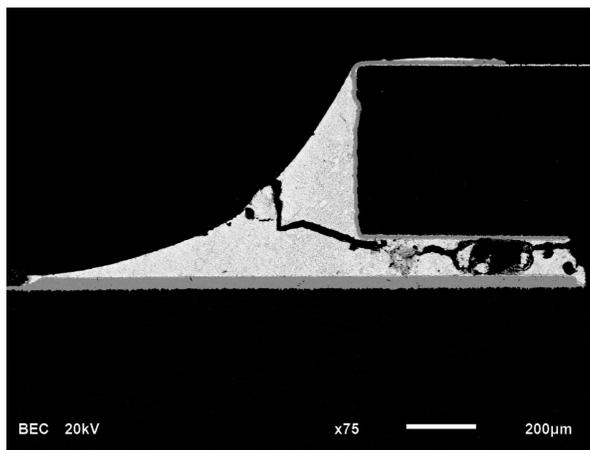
Cross section of cracked SnAgCu solder joint (SEM picture)
